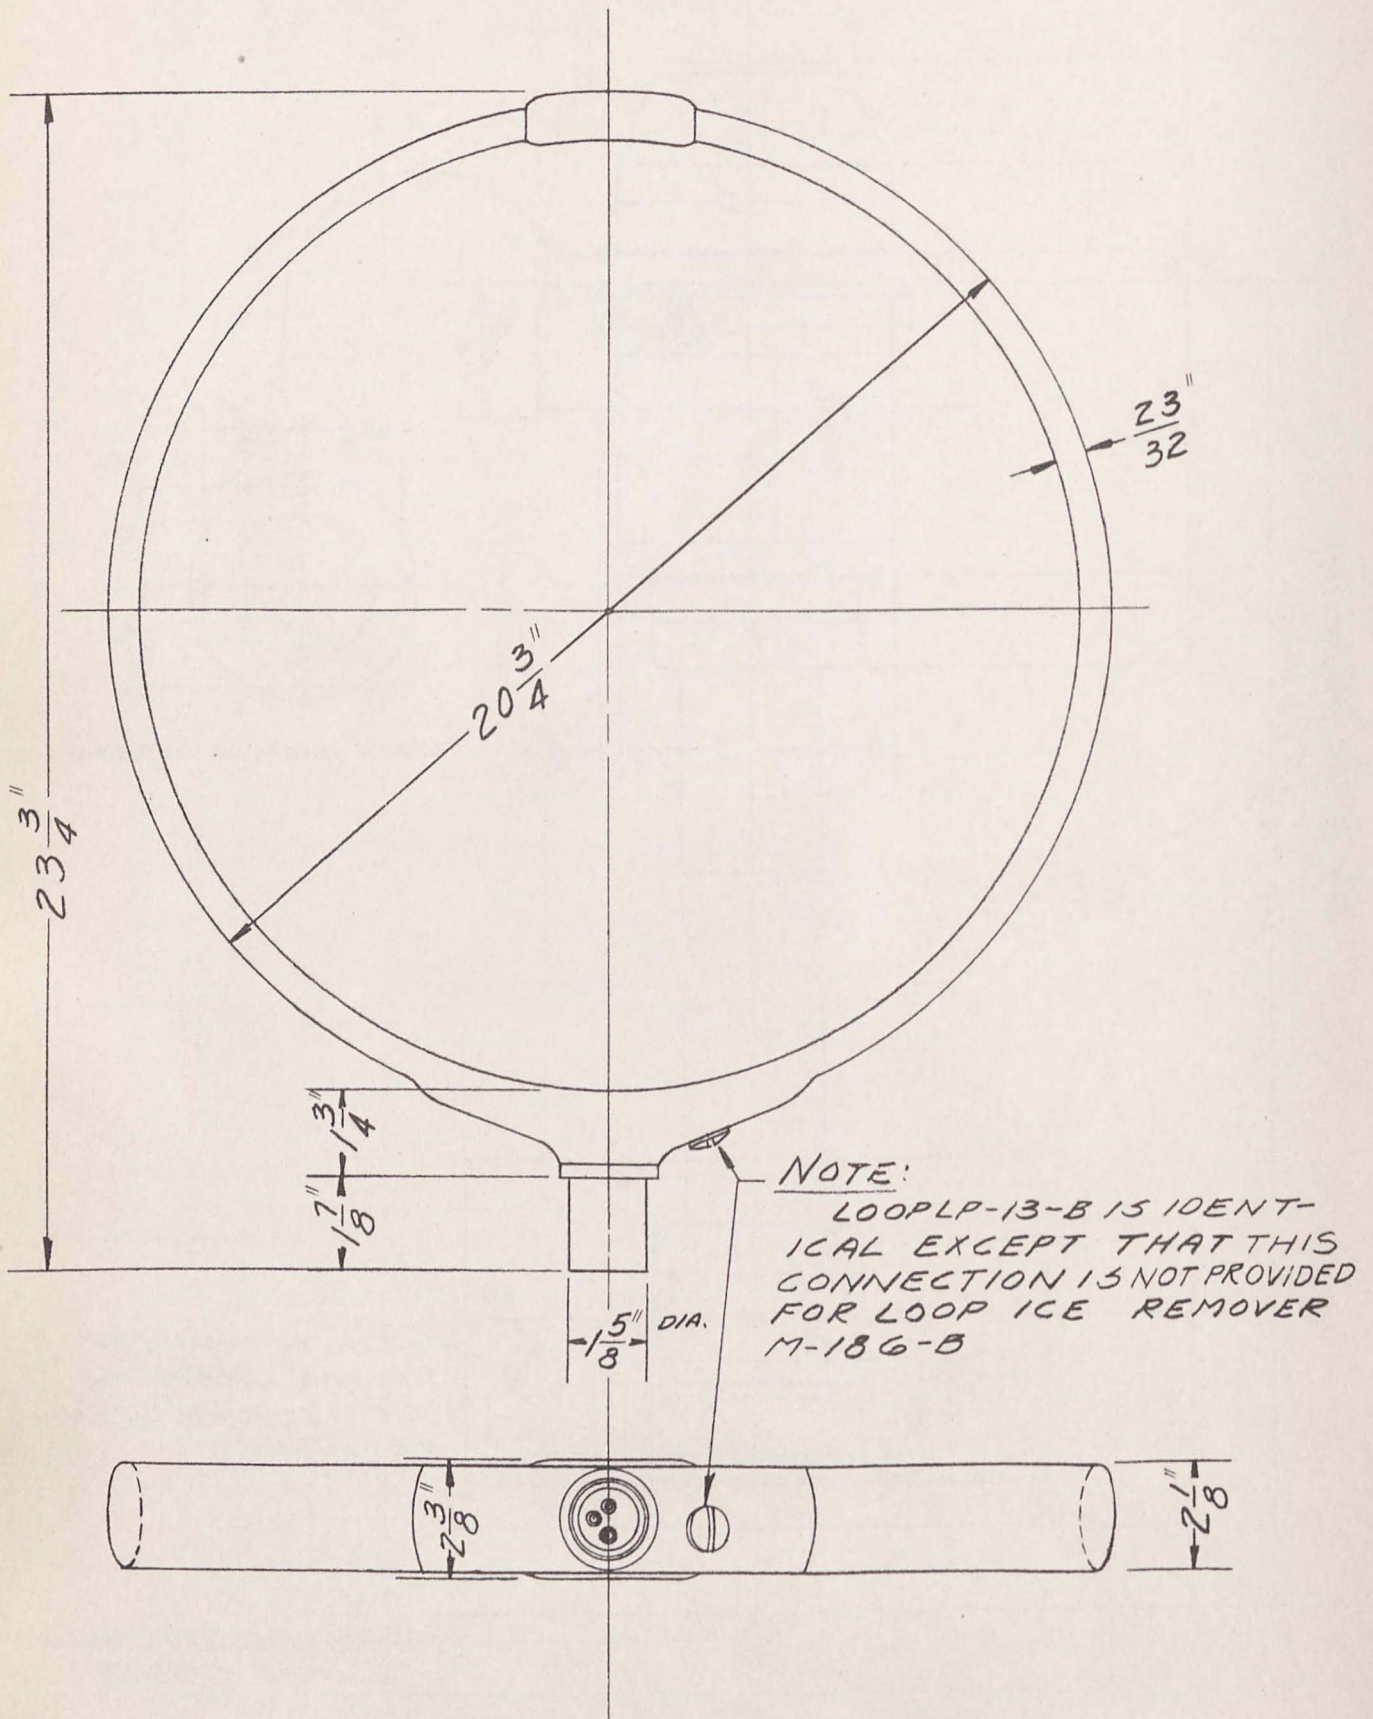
OUTLINE DRAWING—LOOP LP-15-B
